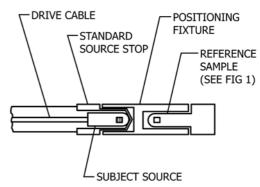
Typical Arrangement Using a Standard Guide Tube and Special Positioning Fixture
